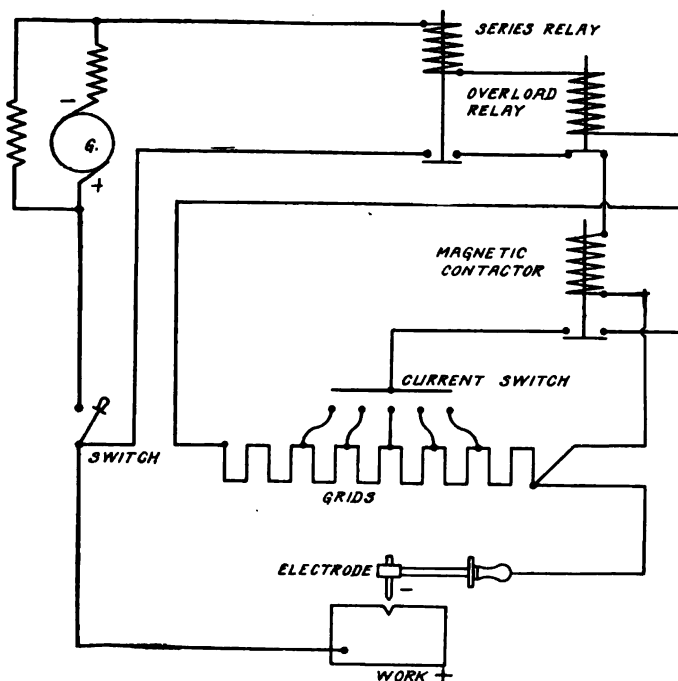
Wiring Diagram for C & C Welding System
